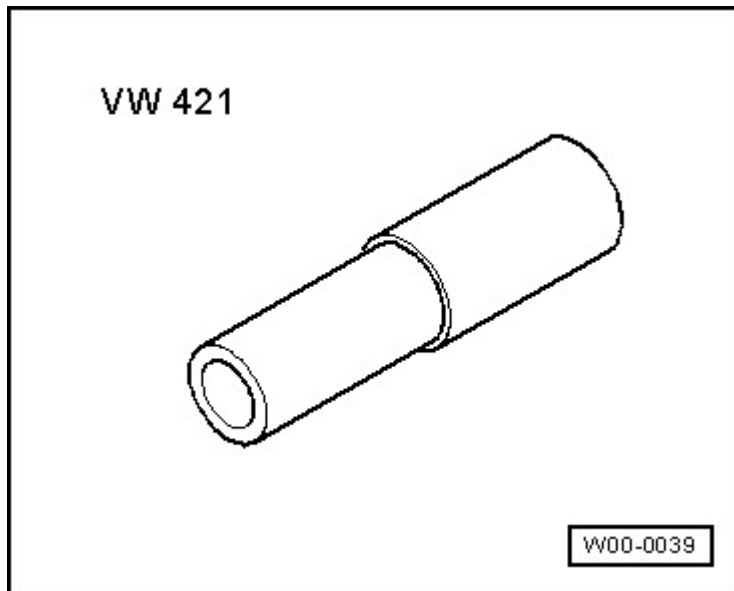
Identifying Tube 28 mm Dia. 100 mm VW 421
